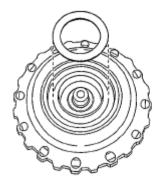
Identifying C2 Clutch Component Disassembly Courtesy of MAZDA MOTORS CORP.
